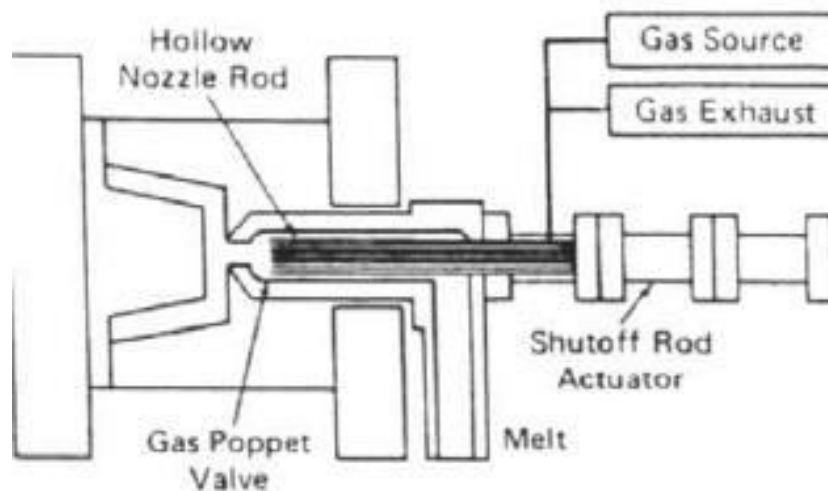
Simultaneously handling gas and melt modified injection molding machine [85].
